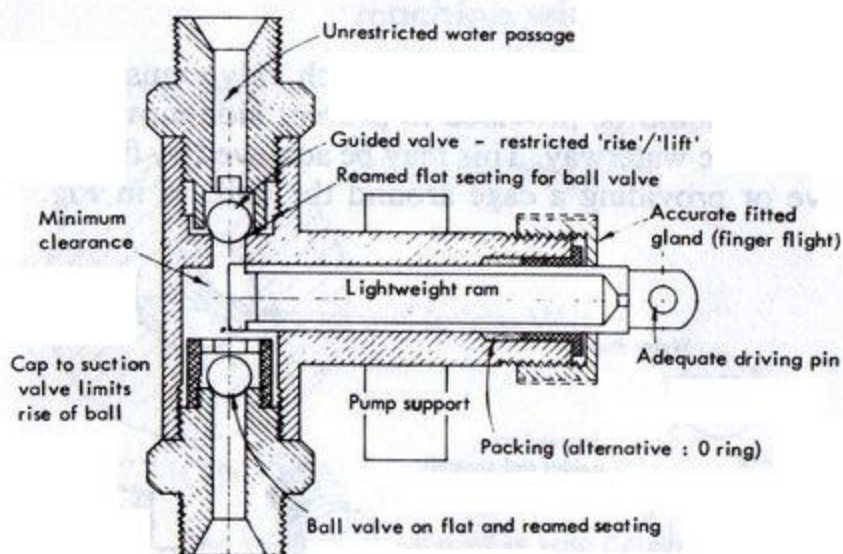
Boiler feed pump about full-size. The accurately fitted gland at A should be 'finger tight'
